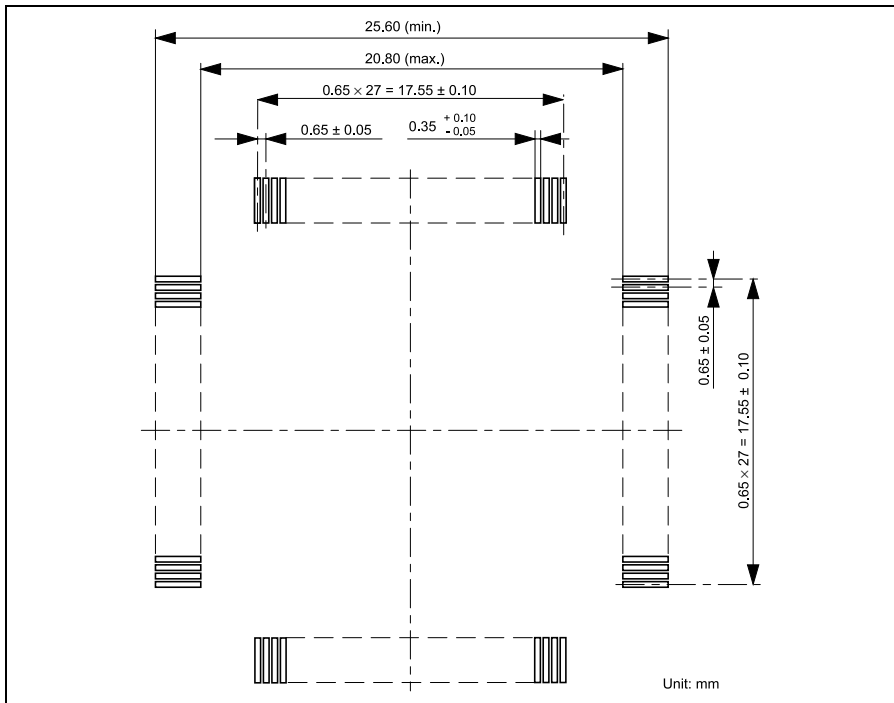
Recommended Mount Pad Dimensions of the User System IC Socket
